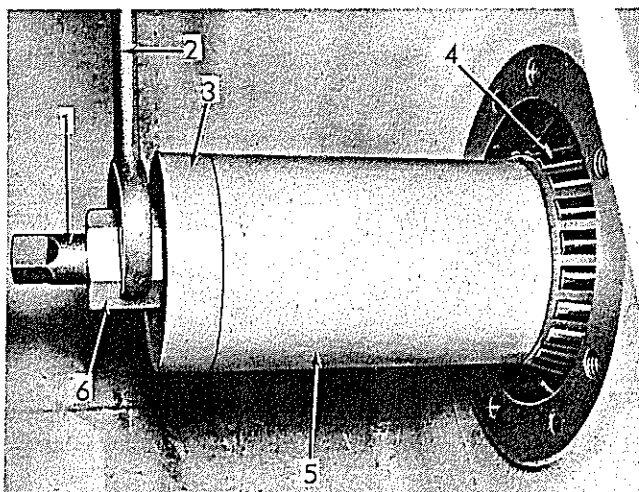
Installing Bevel Gear Shaft Bearing Cone
